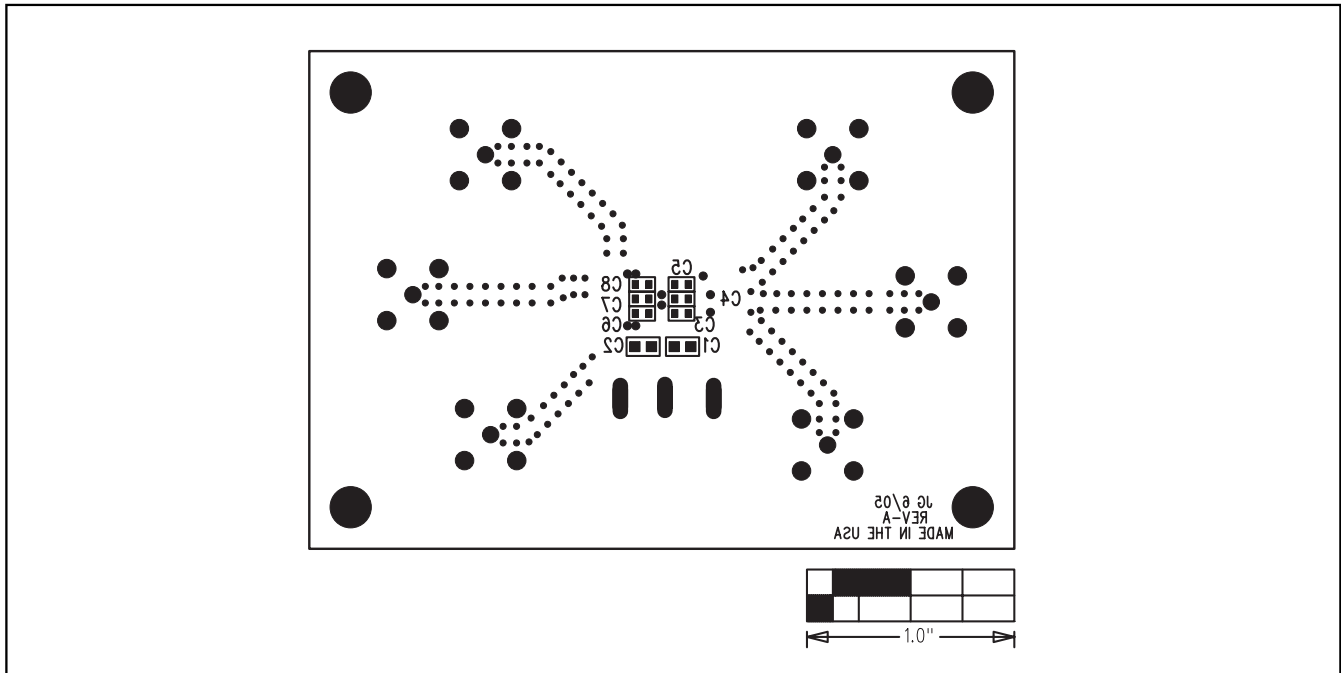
MAX9501 EV Kit Component Placement Guide—Solder Side
